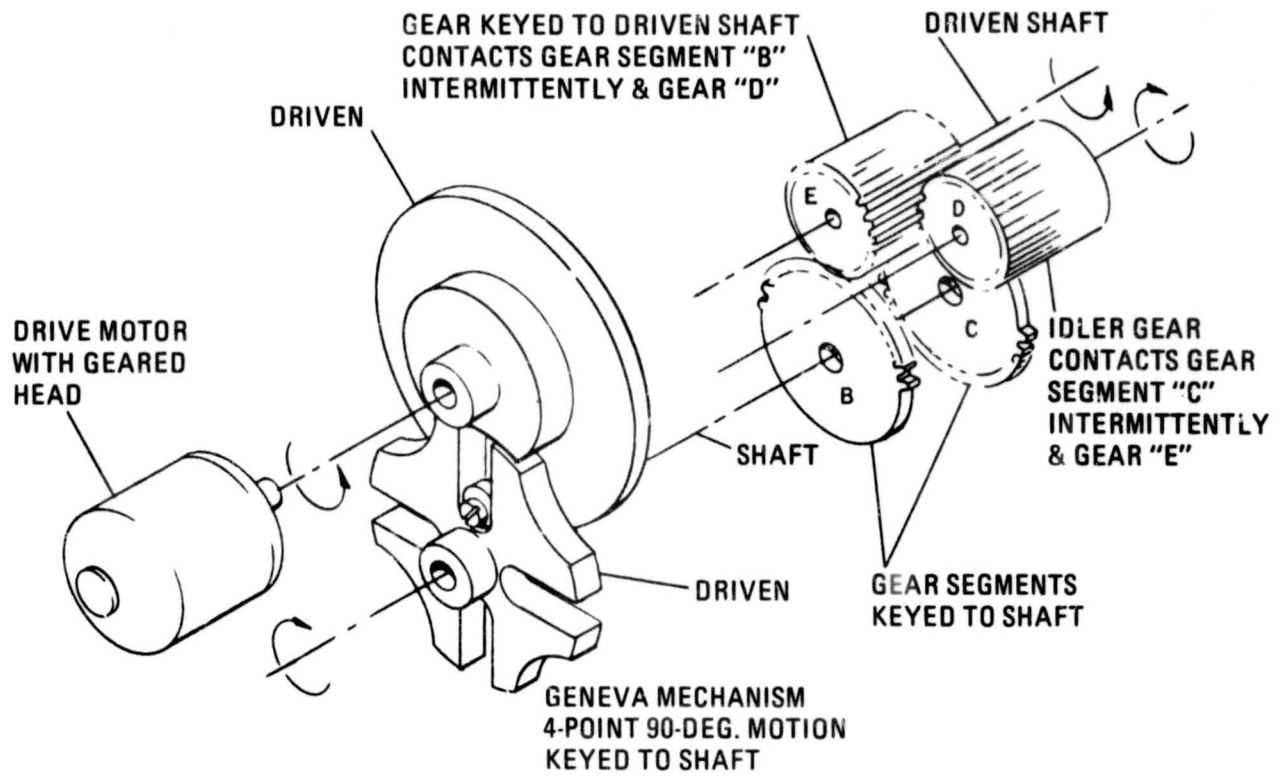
Module with geneva mechanism and segmented gear reverser.
